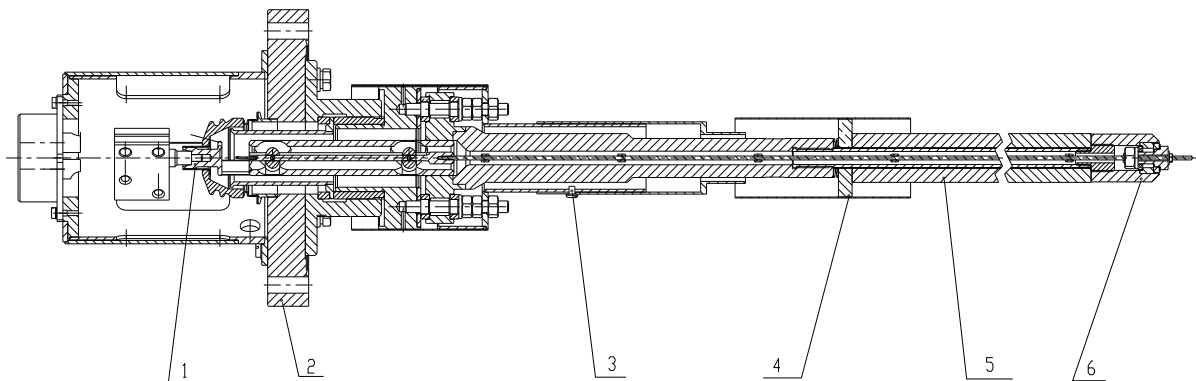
Titanium evaporator drawing. 1 – electrical feedthrough; 2 – CF100 flange; 3 – floating screen; 4 – arc suppressor unit; 5 – titanium rod; 6 – ignition unit.
